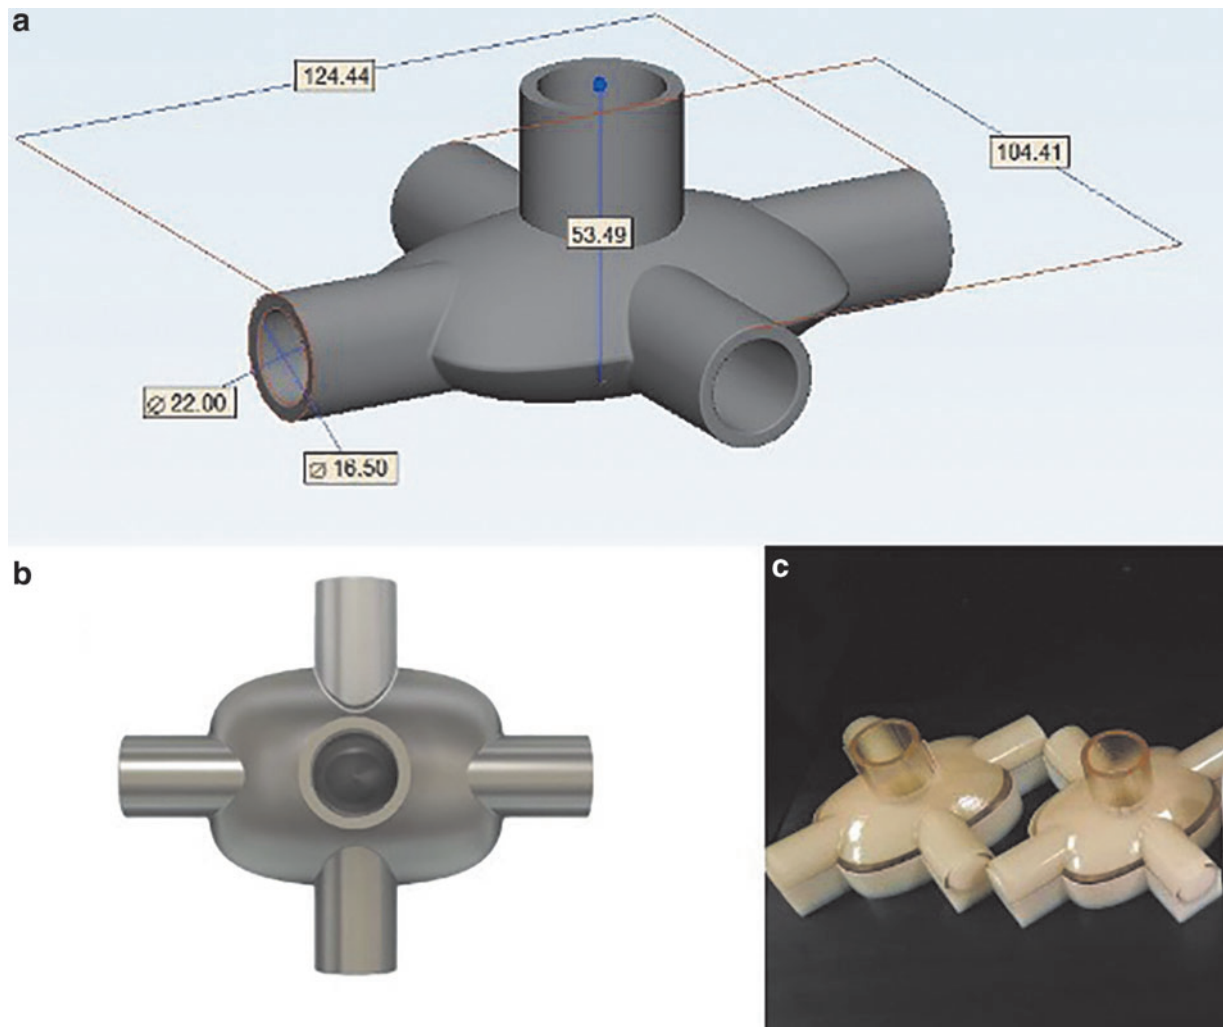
(a) Dimensions, (b) final seem, (c) manufactured version of the four-port splitter.
